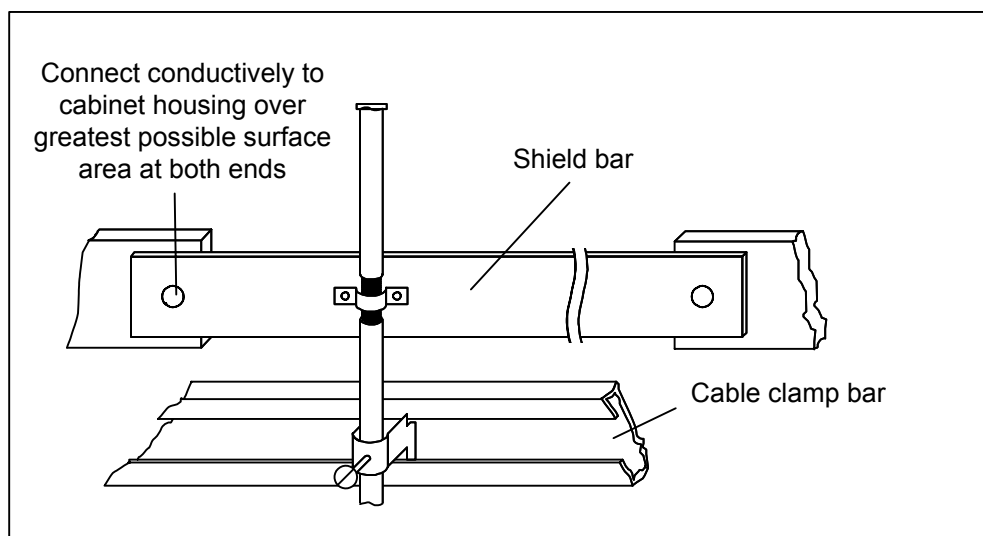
Shield connection for motor cable at cabinet inlet
